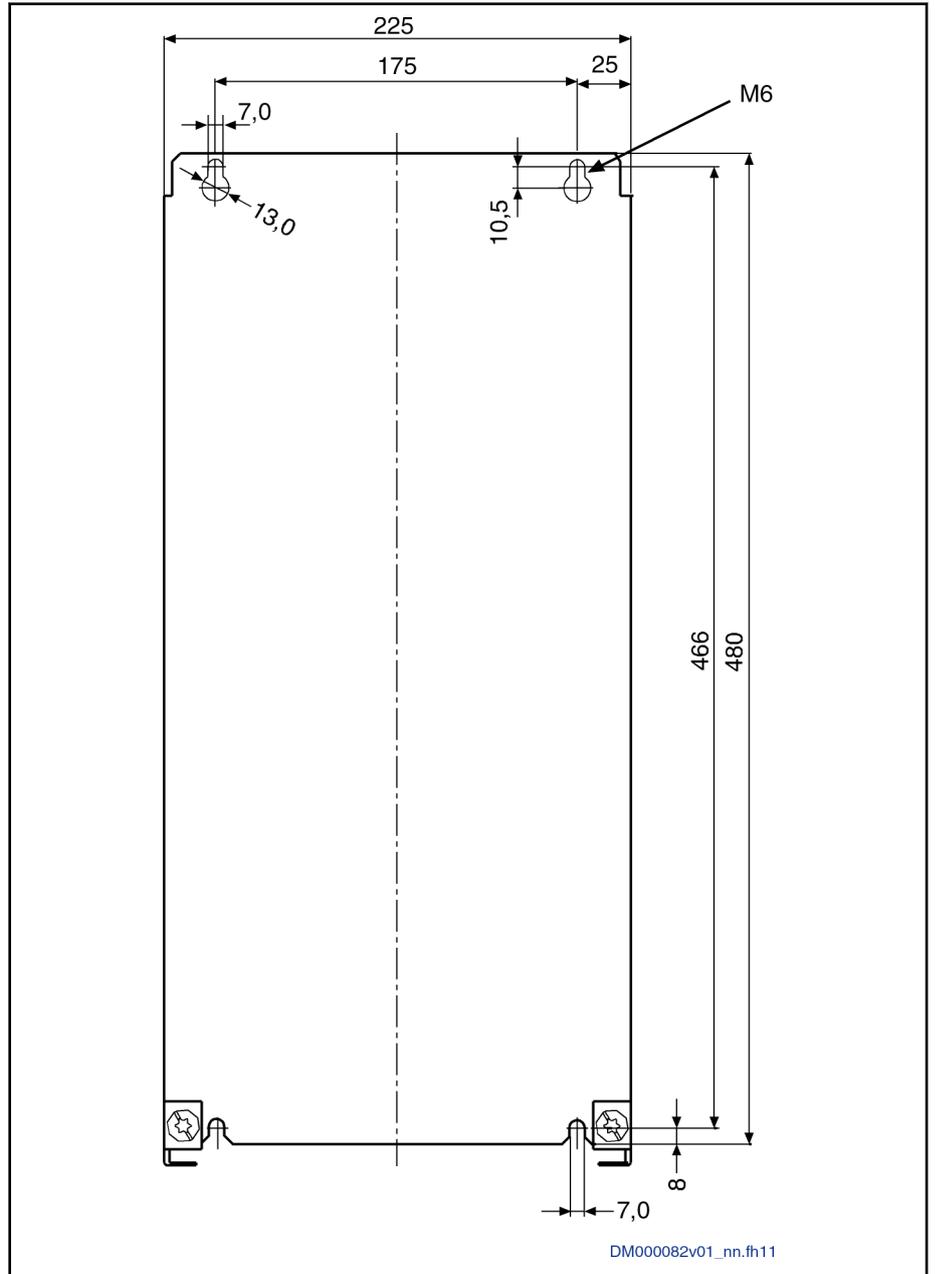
Boring dimensions HCS03.1E-W0100 and HCS03.1-W0150
